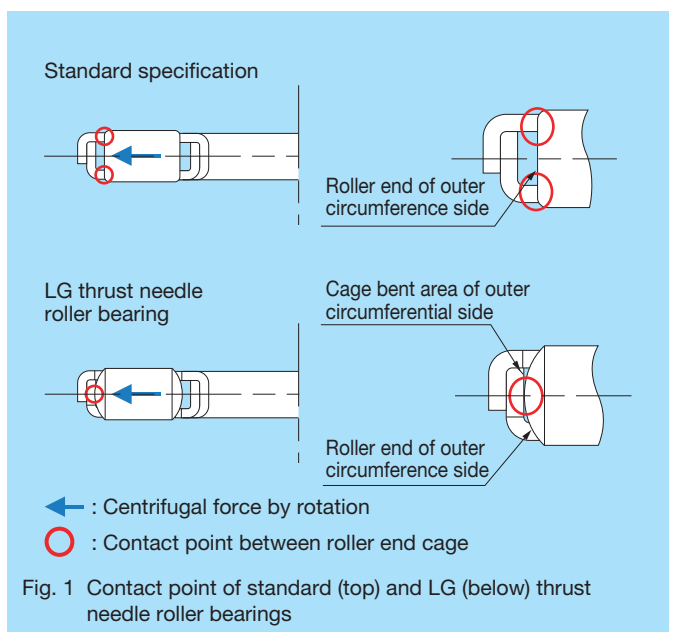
Contact point of standard (top) and LG (below) thrust needle roller bearings
